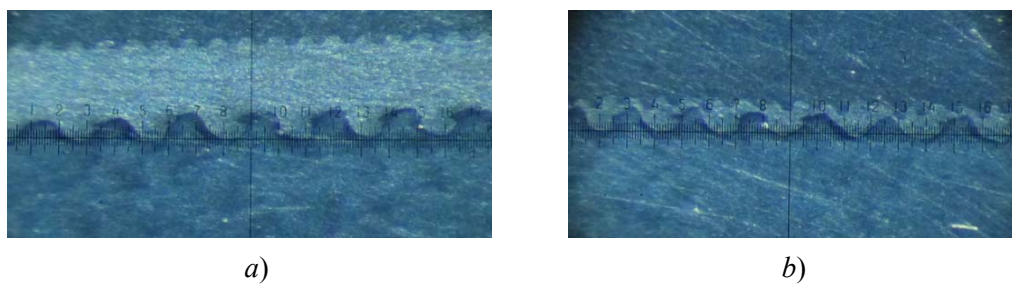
Welding two plates of hardened steel: a – bonding through the interlayer of mild steel, b – direct bonding
